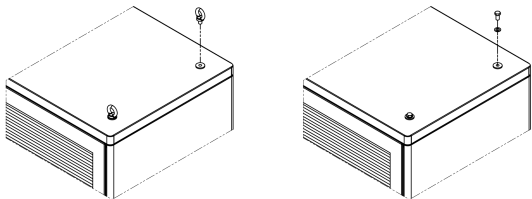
Detail of changing the lifting eye for screw, washer and O'ring
